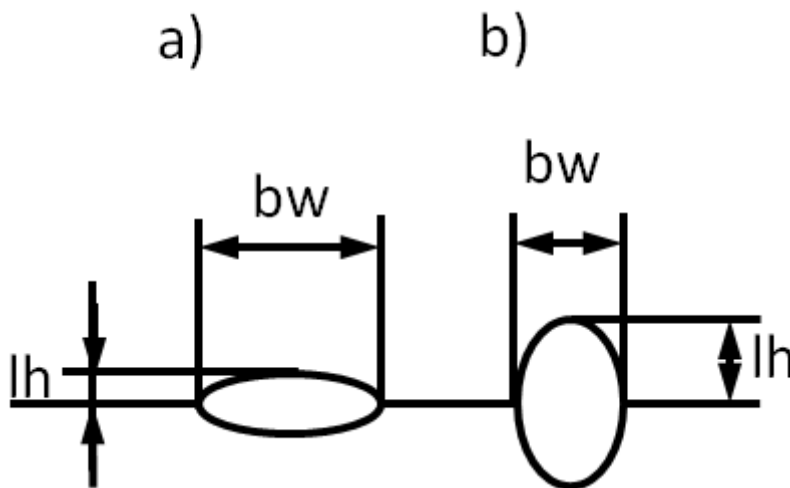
Schematic drawing of the different weld bead shapes; a) wide and flat bead; b) high and narrow bead; lh – layer height, bw – bead width
